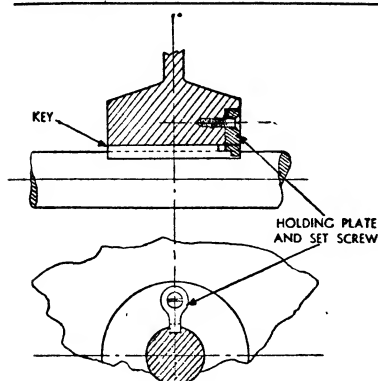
Side and end views of a shaft, showing the feather key by means of which a hub is secured to the shaft so that they will rotate together. The hub is specially machined to take the key, which is fitted into place before being slid on to the shaft.
